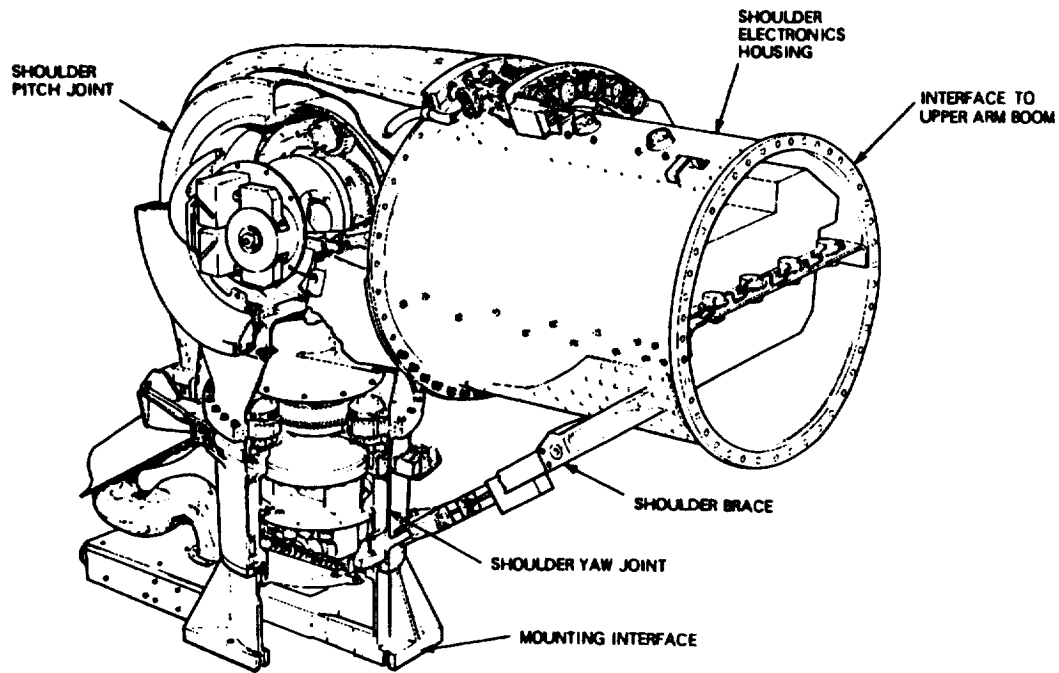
Shoulder Joint Assembly of the SRMS.<sup>20</sup>
